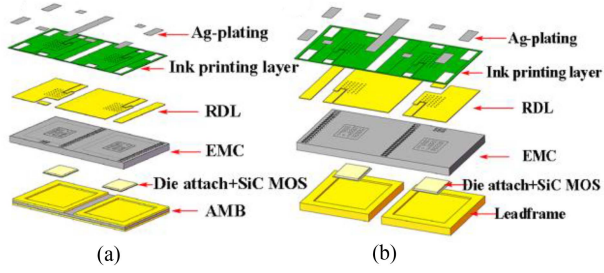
3D exploded view of embedded packaging cells for (a) AMB carrier and (b) lead-frame carrier.
